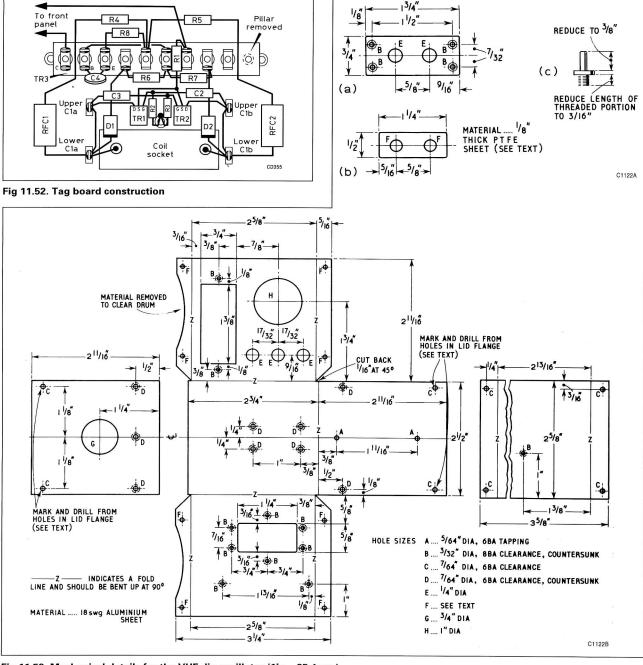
Mechanical details for the VHF dip oscillator (1in = 25.4mm)
